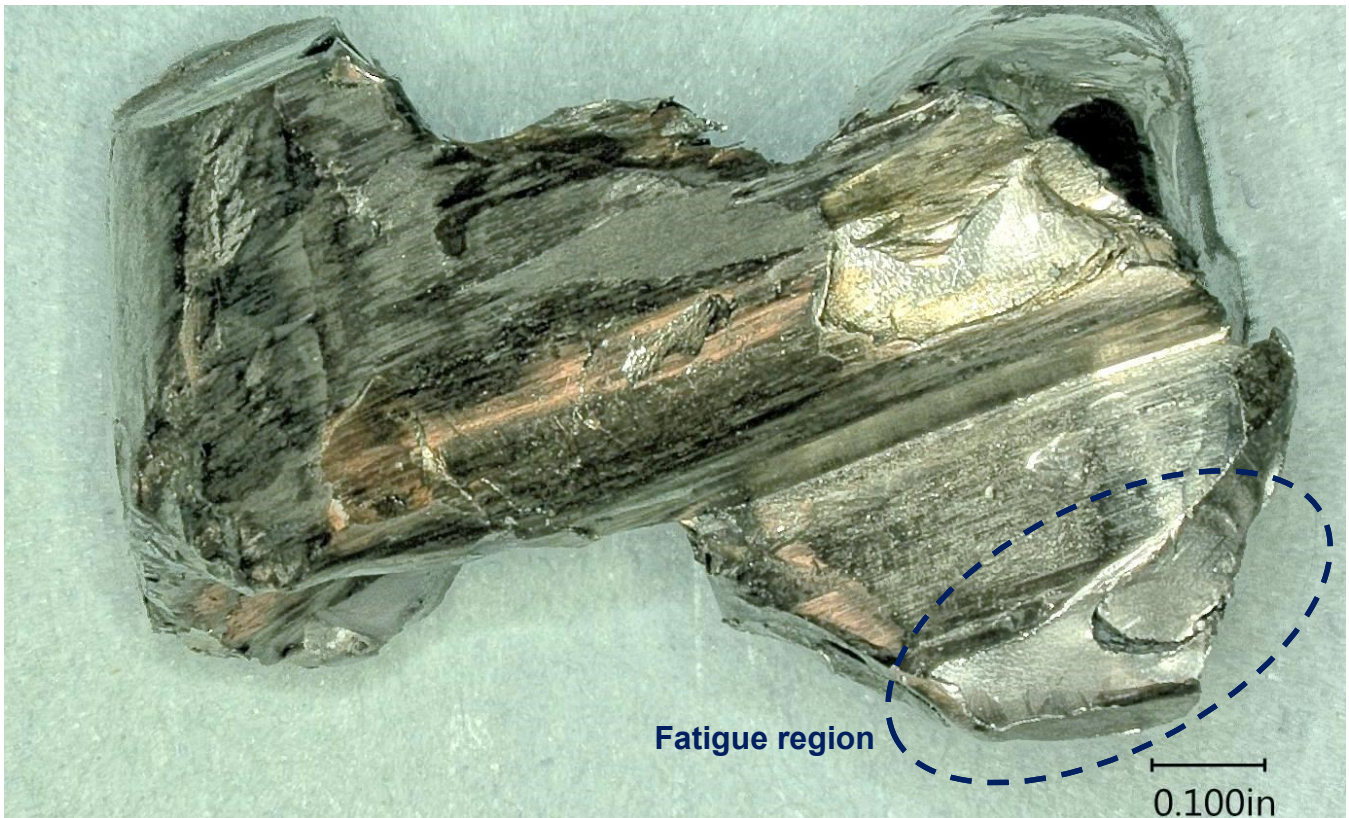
The fracture surface of the #1 connecting rod in the shank, from the crank end. The area in the lower right is magnified in Figure 4.
